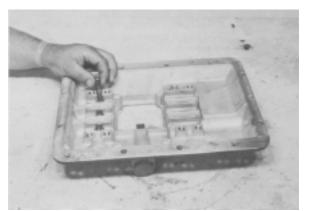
Remove mesh lock spring and lock ball, 3 each. Remove crossover interlock balls, 4 each.
